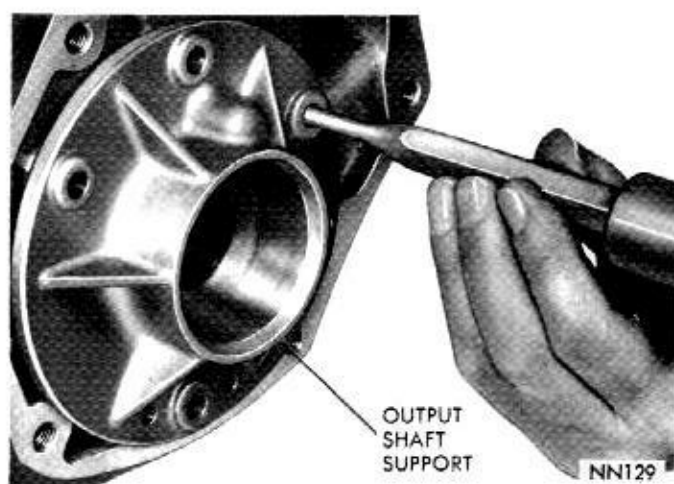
Removing Overrunning Clutch Cam (A-727)
